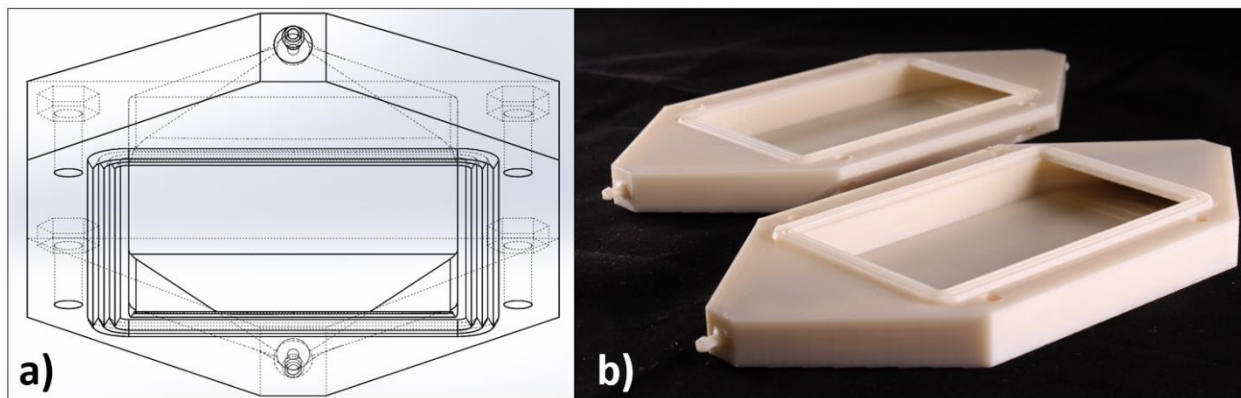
a) Solidworks tilted view of angled grooves. b) Memboxx 3.0 printed grooves.
